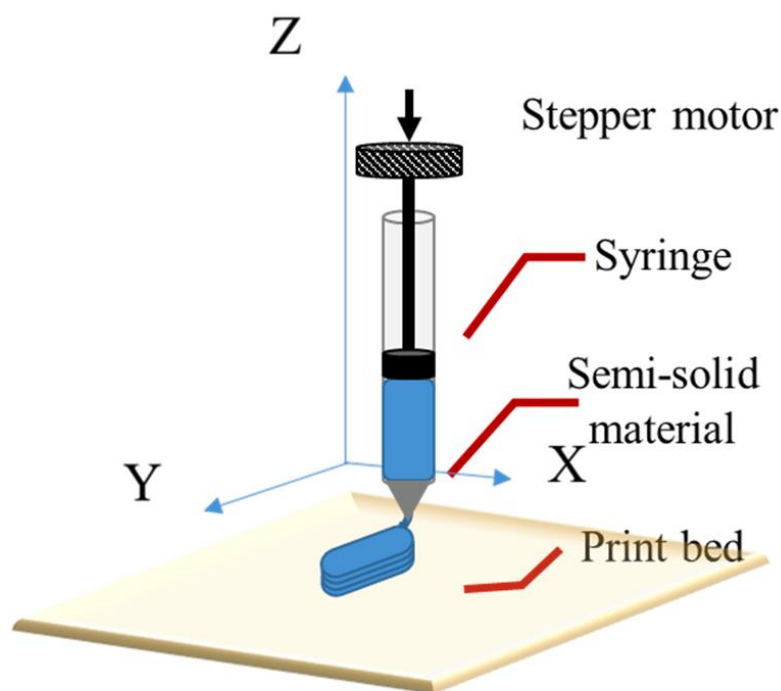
Schematic exemplifying a semi-solid extrusion printing process with a stepper motor [64]
